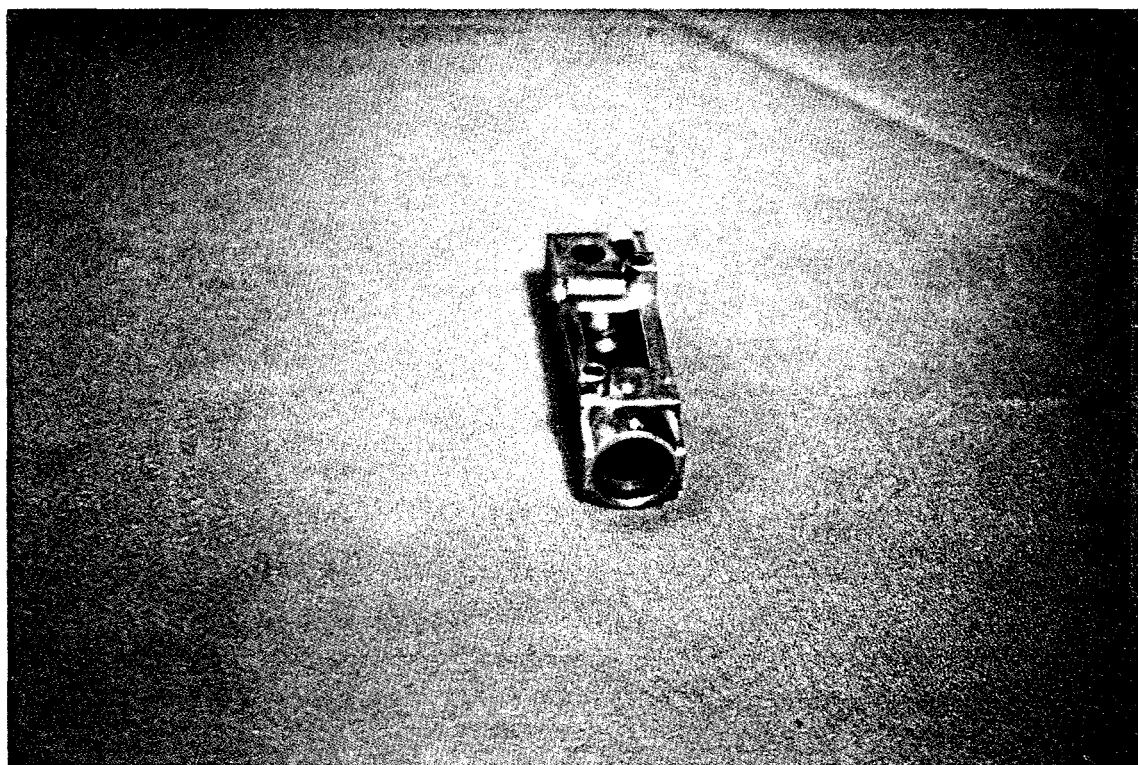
Electronic switch housing casting produced by Company C for die soldering confirmation trials.
